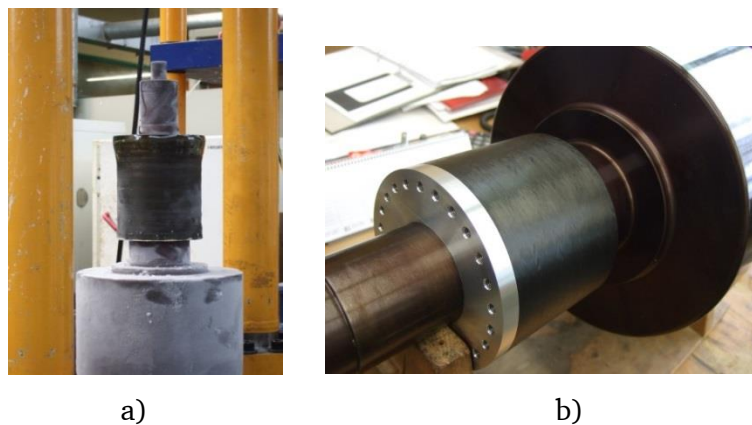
Flywheel rotor with mounted carbon fiber bandage: a) before bandage surface grinding, b) after bandage surface grinding
